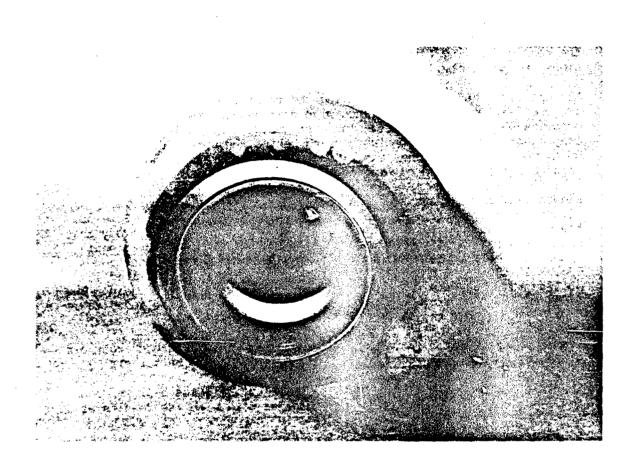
Turbocharger Turbine Housing After 200 Hours
